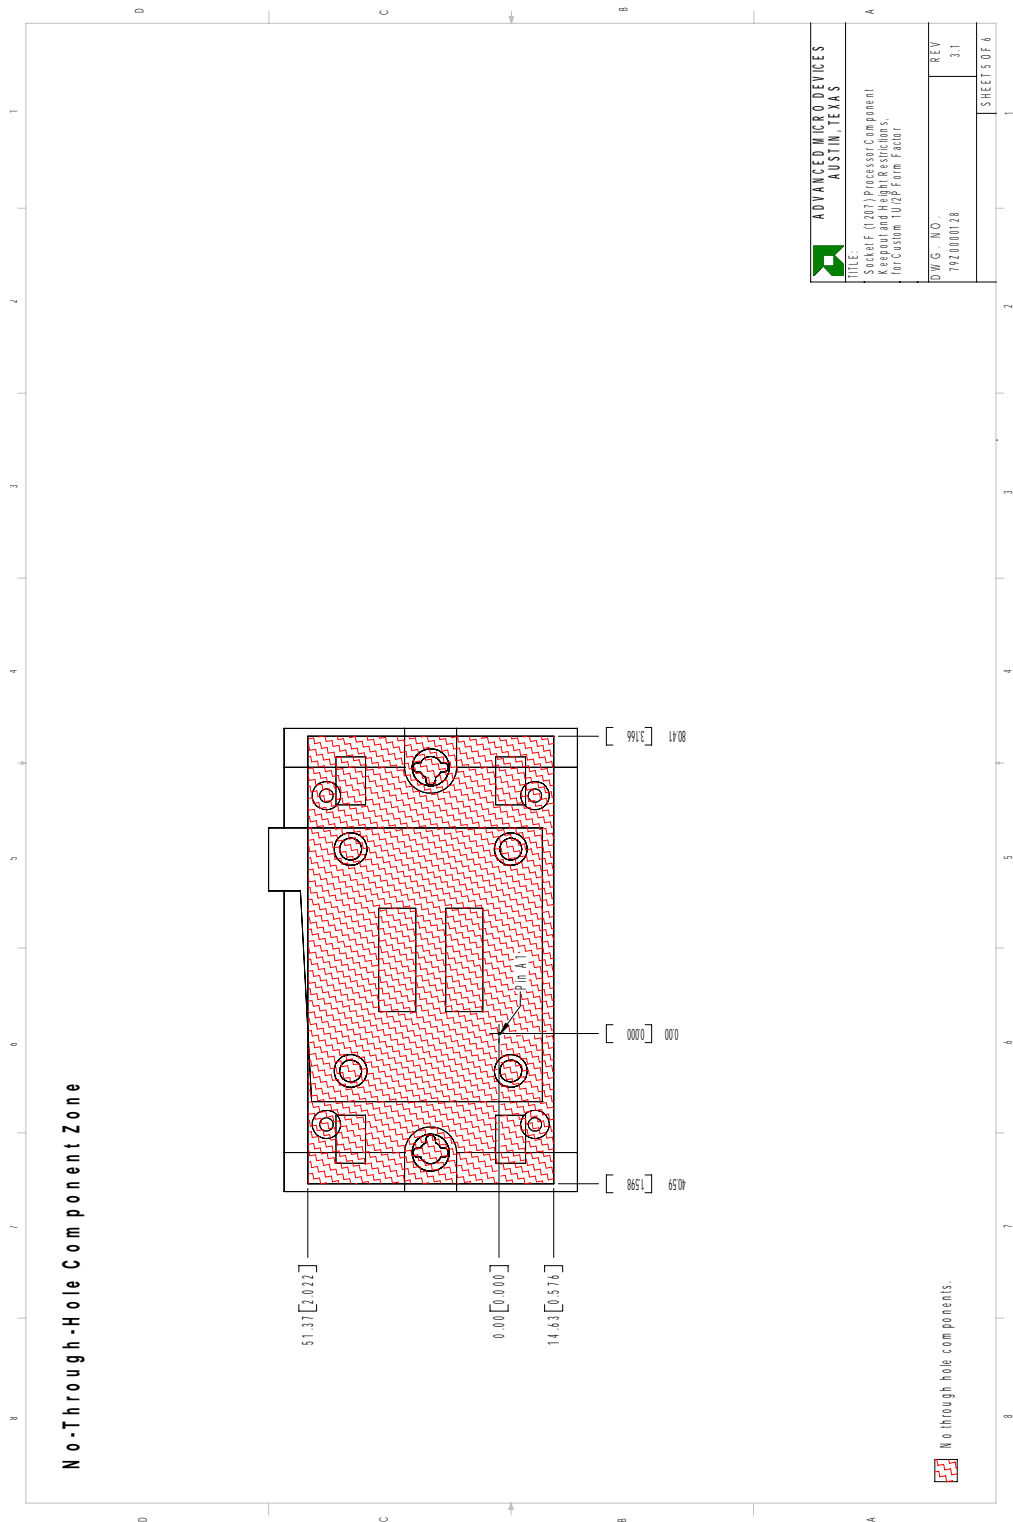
Socket F (1207) 1U-2P Board No-Through-Hole Keep-Out
